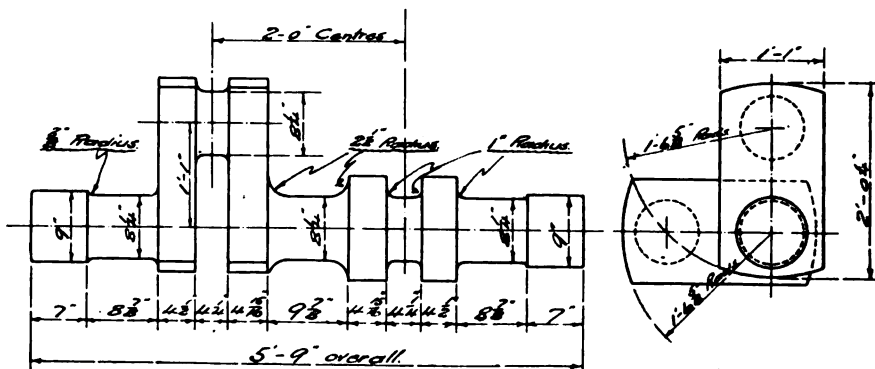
A MODERN LOCOMOTIVE CRANK-AXLE.
